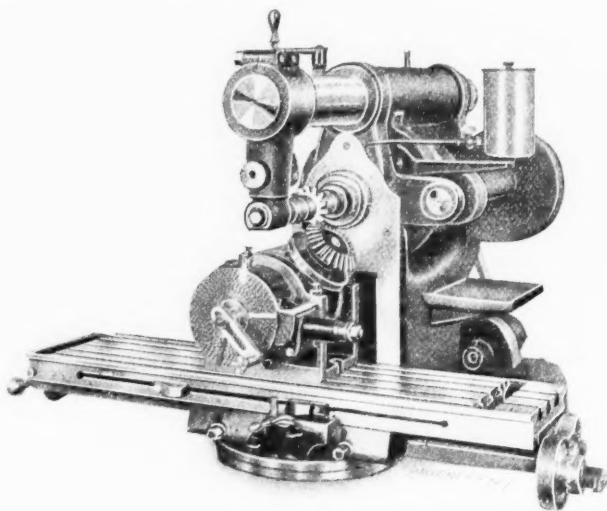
Cutting Bevel Gear Teeth on a Milling Machine by the Formed Cutter Method.
